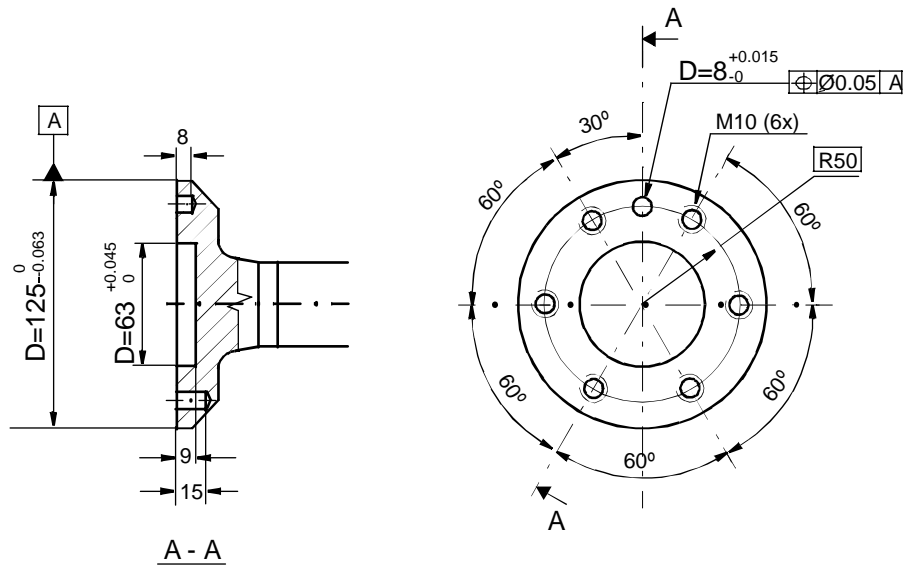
The mechanical interface, mounting flange (dimensions in mm).
